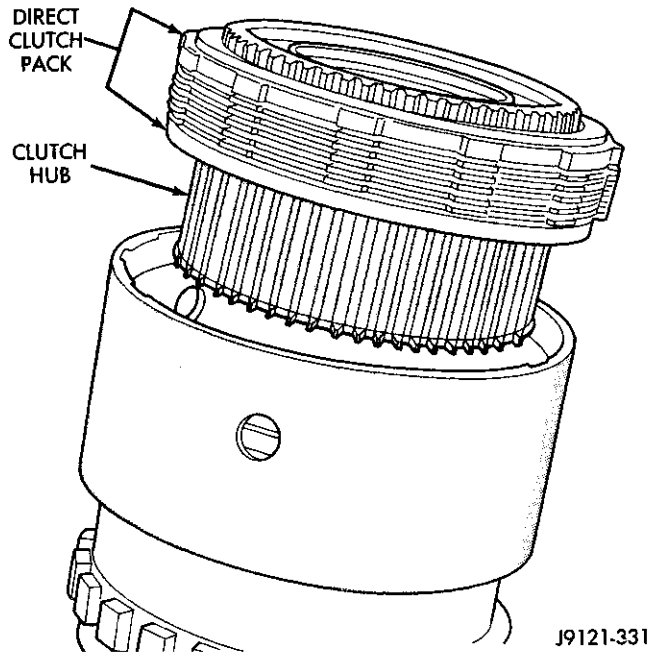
Installing Assembled Direct Clutch Pack And Hub
